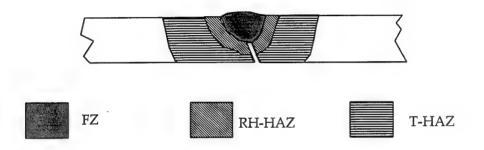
Schematic diagram of section from Y-groove weldment showing the three zones
